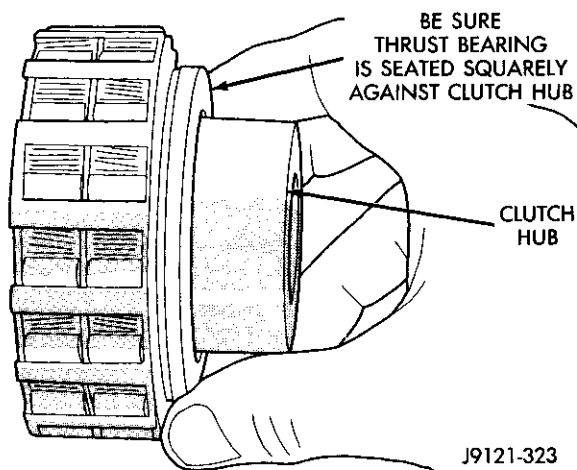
Overrunning Clutch Thrust Bearing Installation
